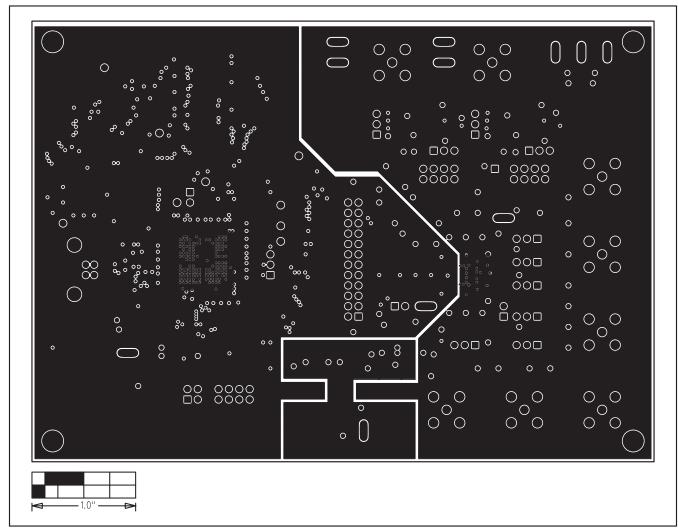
MAX11046 EV Kit PCB Layout—Inner Layer 4 (Ground)
